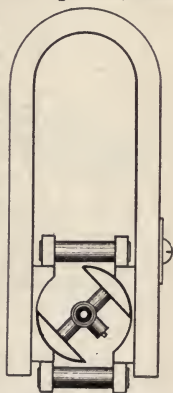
SECTION OF MAGNETO GENERATOR, SHOWING PERMANENT MAGNET AND ARMATURE SHUTTLE.
